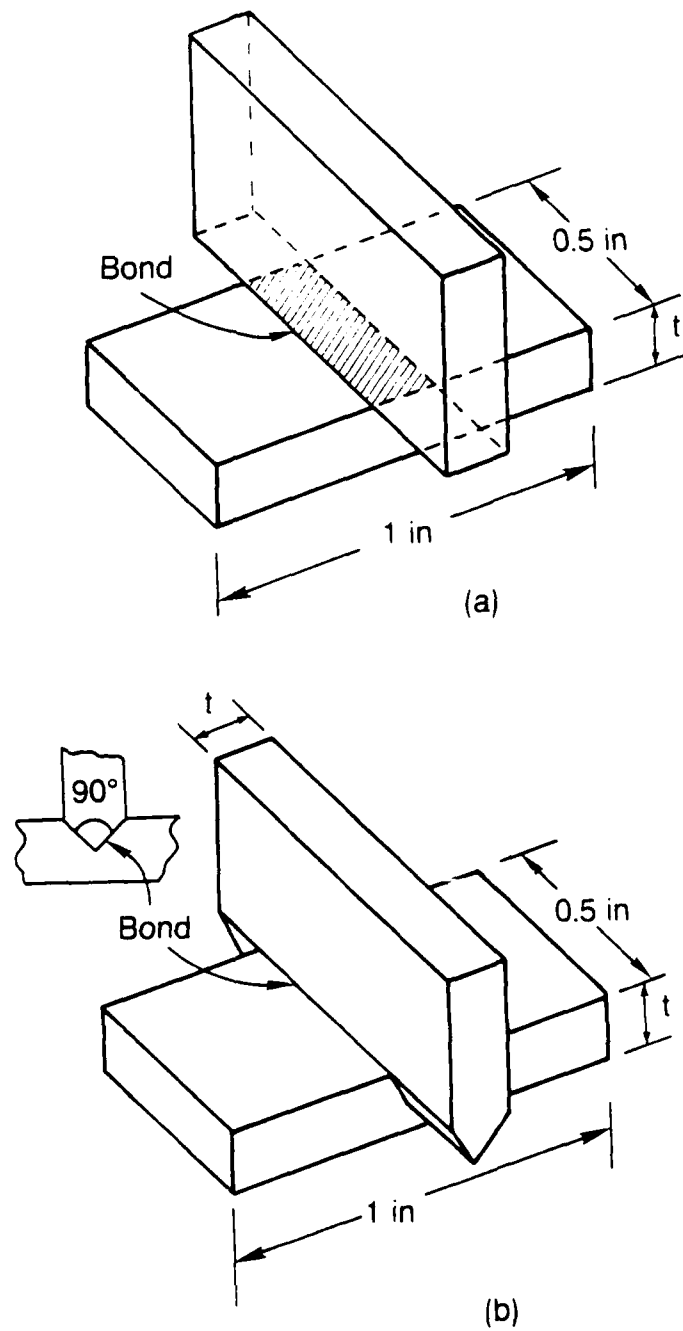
(A) T-JOINT, AND (B) MODIFIED T-JOINT SPECIMENS
